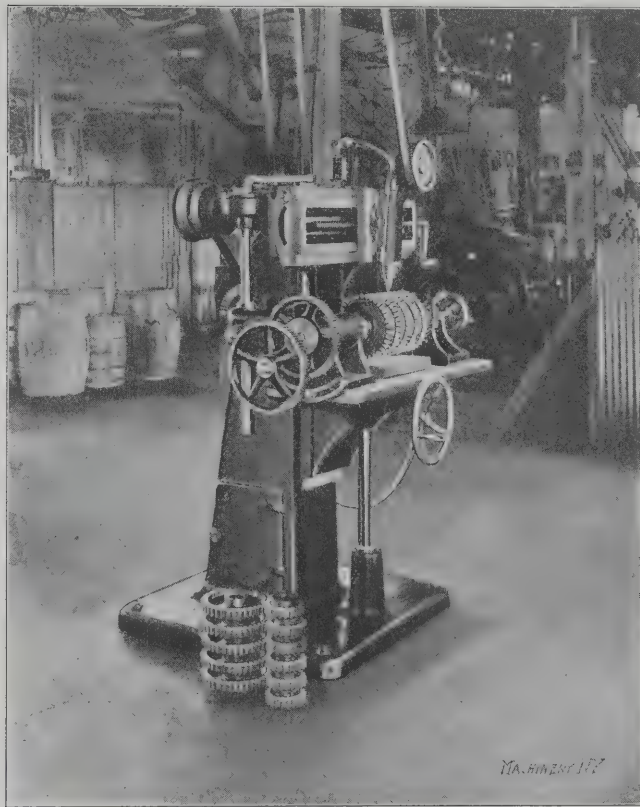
Chamfering the Teeth of Spur Gears in the Winton Factory
